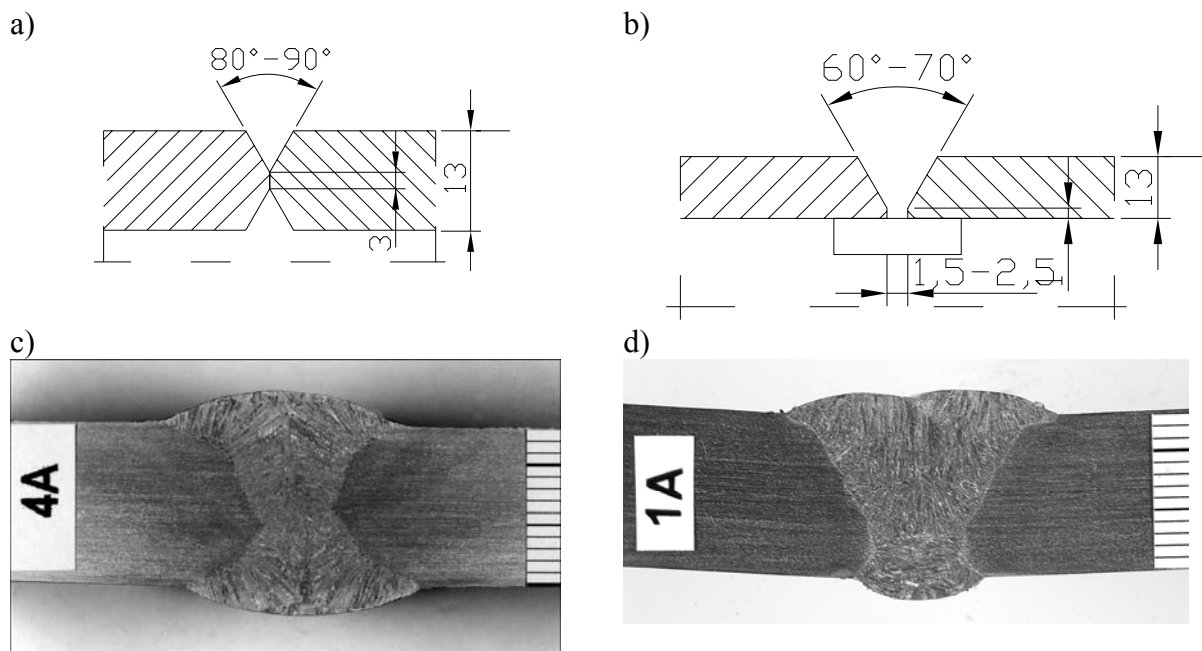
Edge preparation for butt welded joints; a) 2Y, b) Y, c) cross section of SAW welded joint
